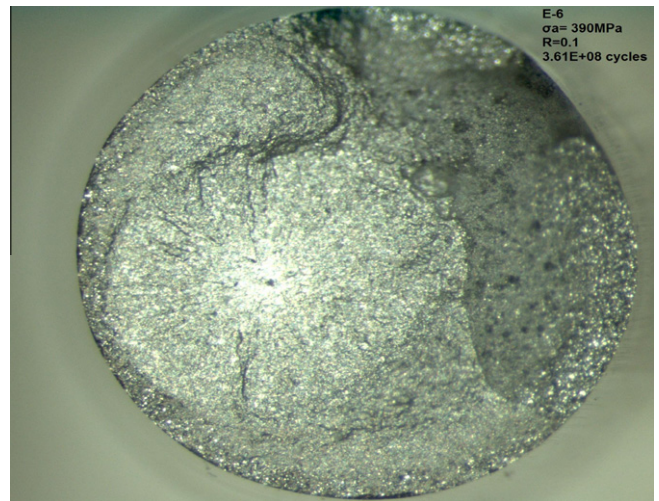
Observation of the fracture surface by optical microscopy (bearing steel, specimen E6).
